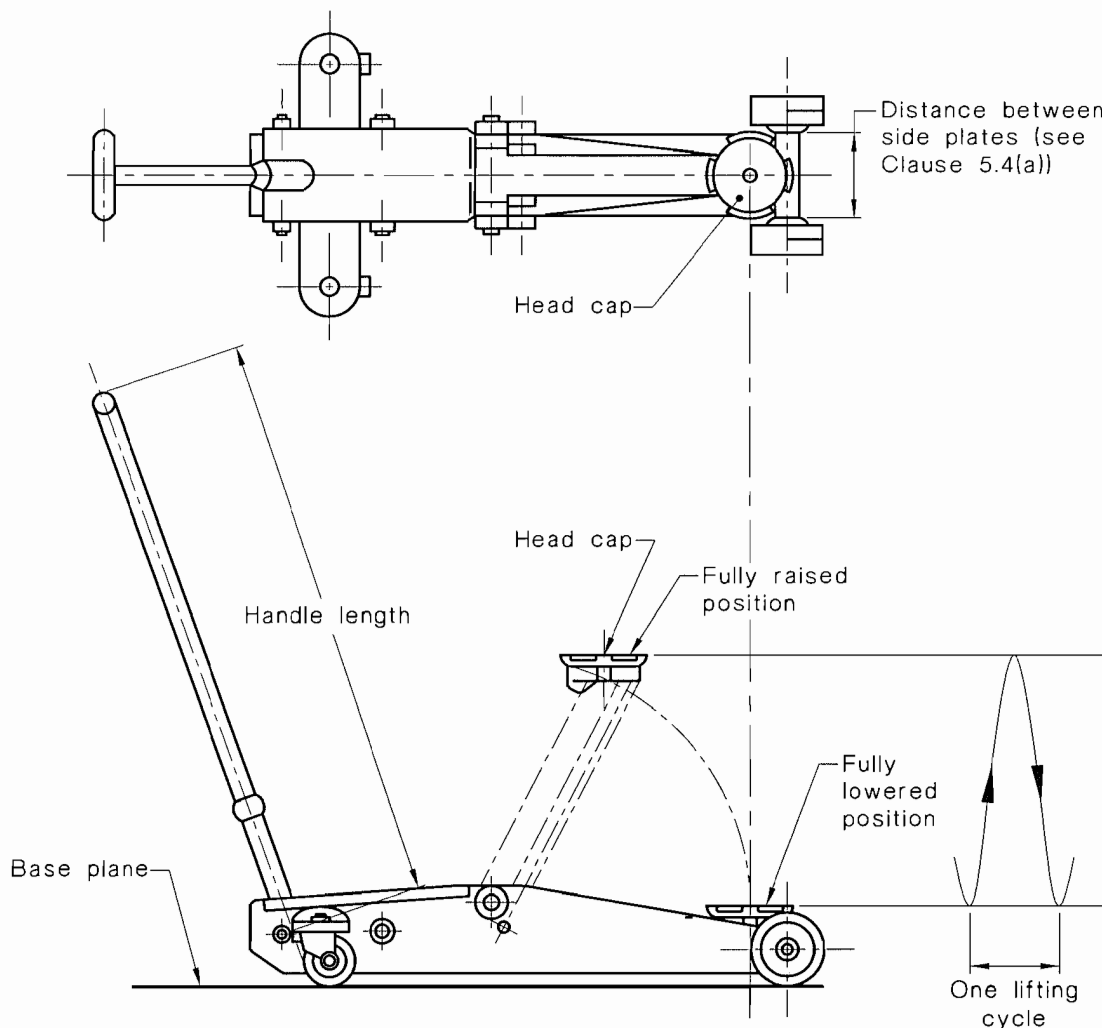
TERMINOLOGY FOR A TYPICAL HYDRAULIC TROLLEY JACK
